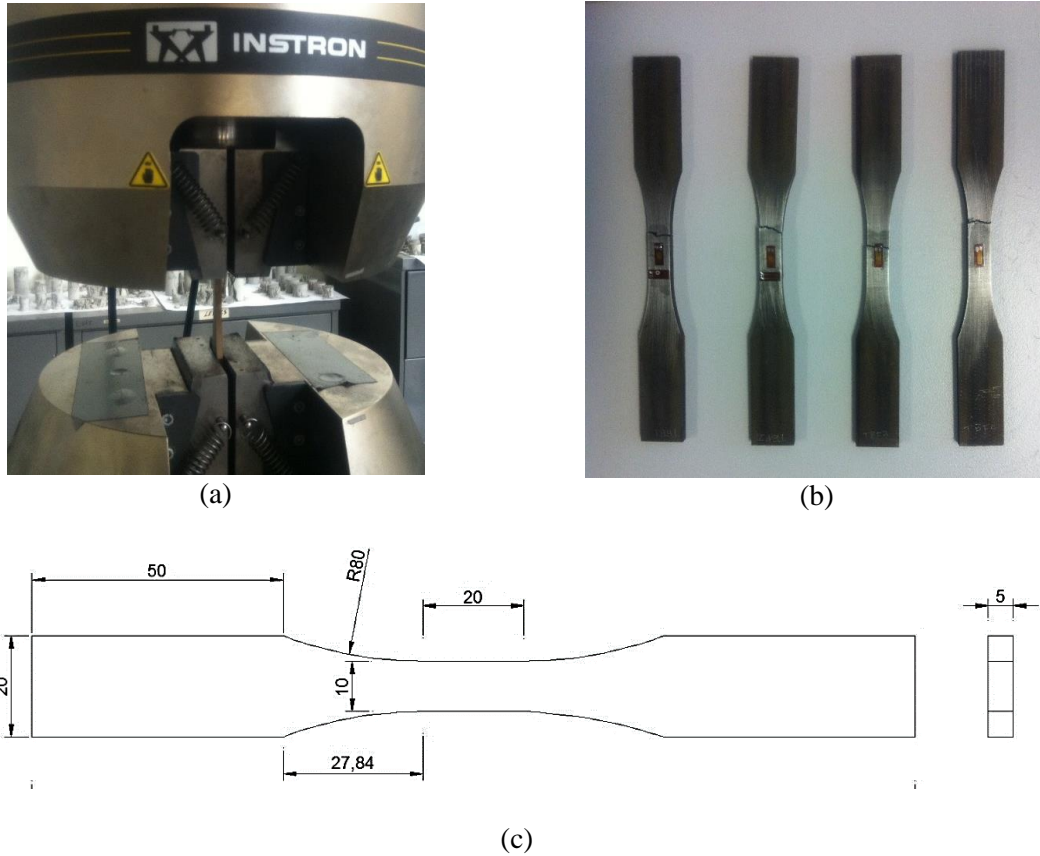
1 (a) Fatigue testing, (b) Fractured cast iron specimens, (c) Sketch of fatigue test specimens (mm)
